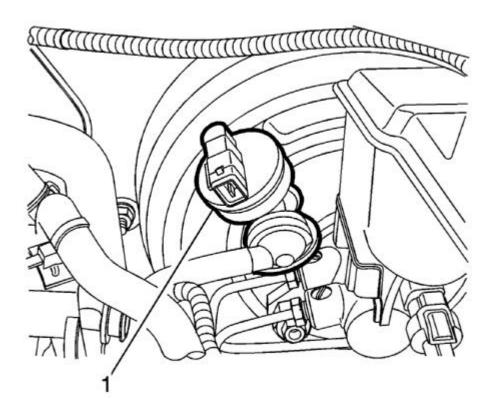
Electrical Vacuum Pump Courtesy of GENERAL MOTORS COMPANY
